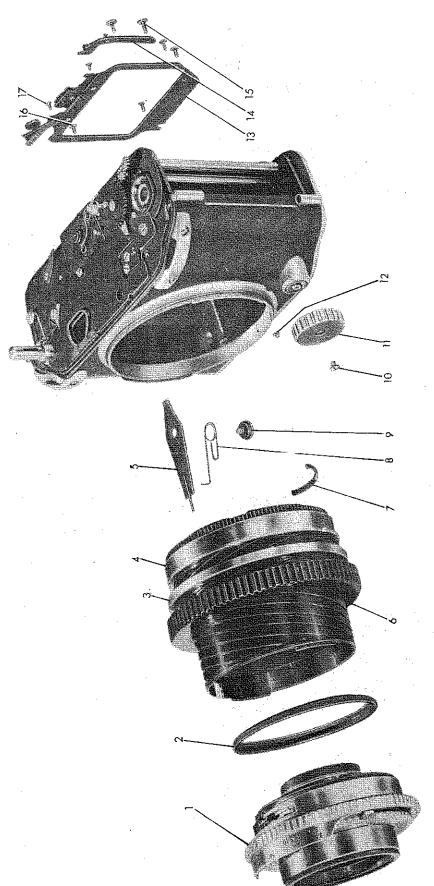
Shutter and Focusing Tube Assembly, Exploded from Camera Case
